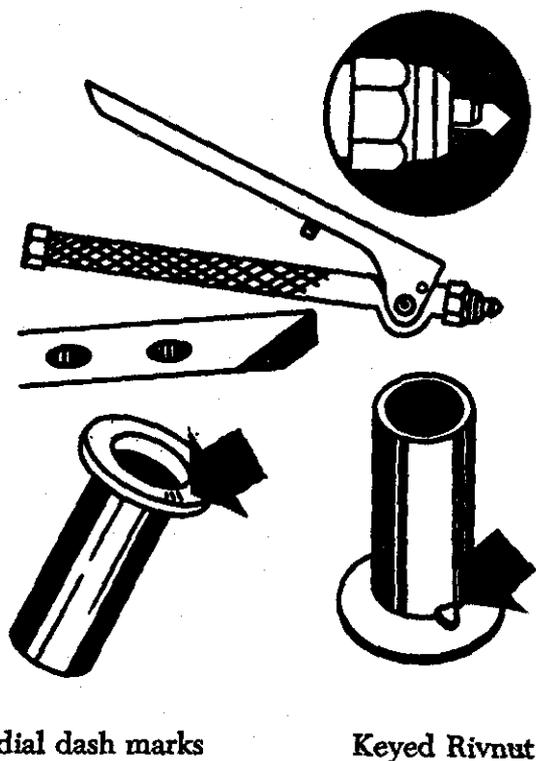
Keyed Rivnut and keyway cutter.
